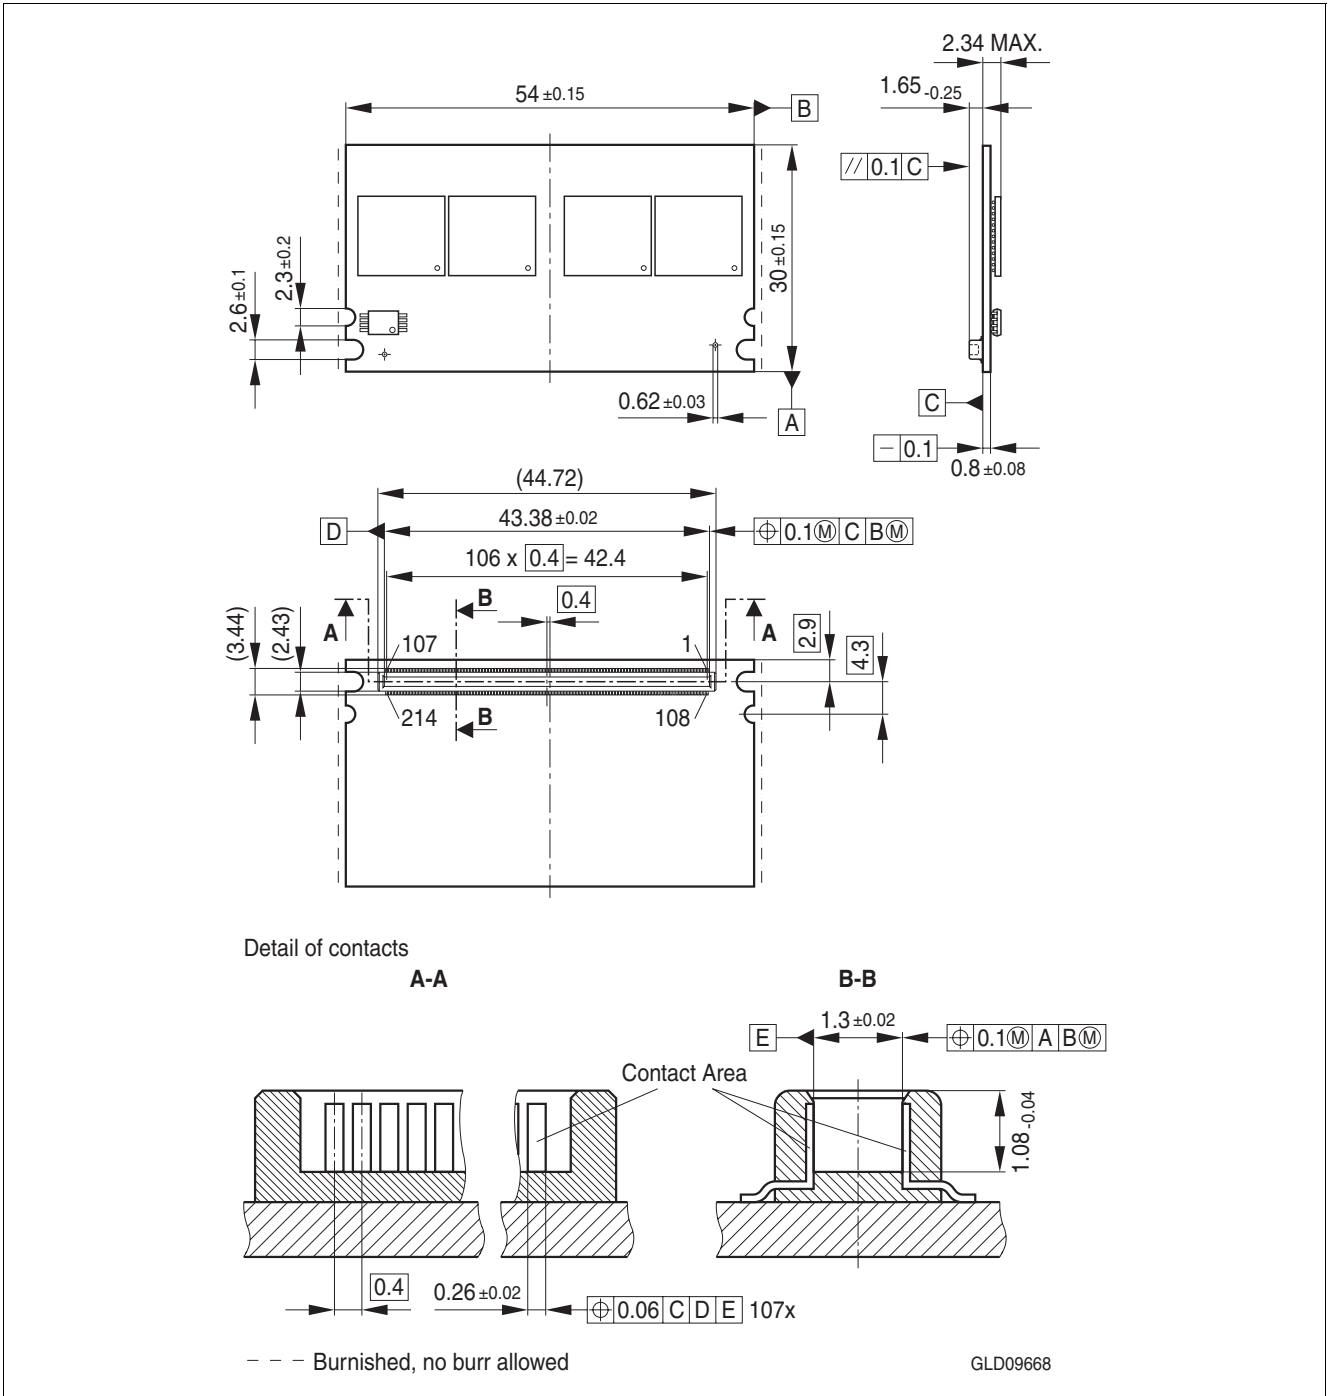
PCB Raw Card B Component Placement L-DIM-214-2
